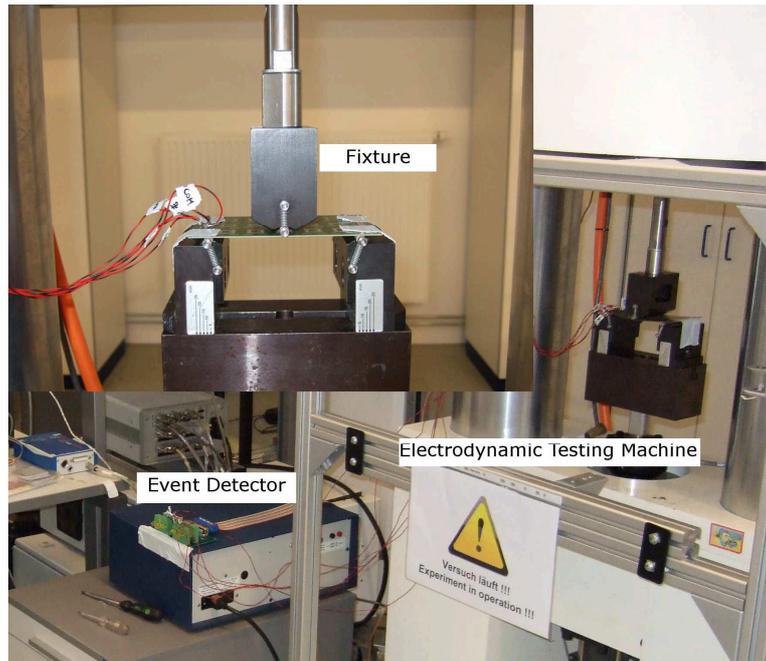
The test set-up of the BLCBT, showing the three point bending fixture with a mounted PCB, the testing machine and the event detector.
